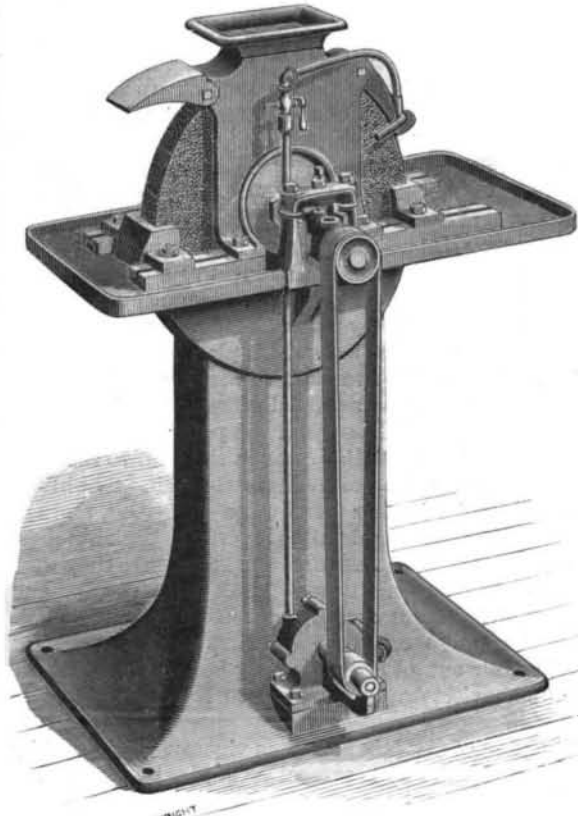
THE STILES MACHINIST'S TOOL GRINDER.
